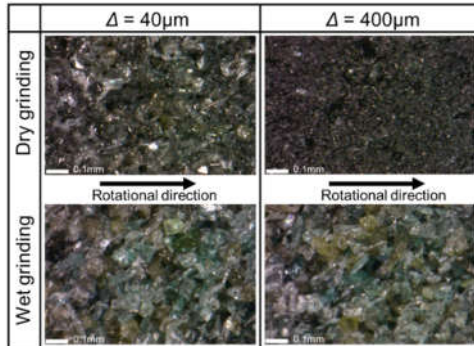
Wheel surfaces after grinding (fiber angle of $\theta=0^\circ$)
